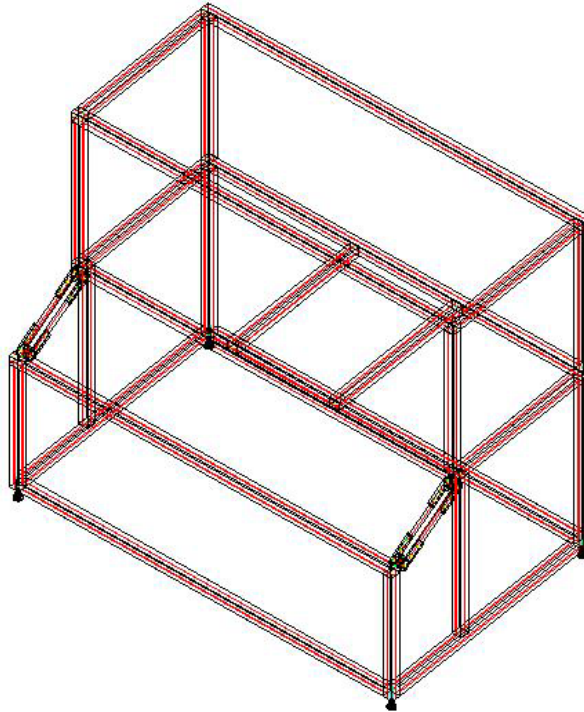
Assembly drawing sent to us by the 8020 company. It shows the feet brackets and hole spots for the assembly of our casing as well as two additional supports that we did not account for that 8020 felt we should include.
